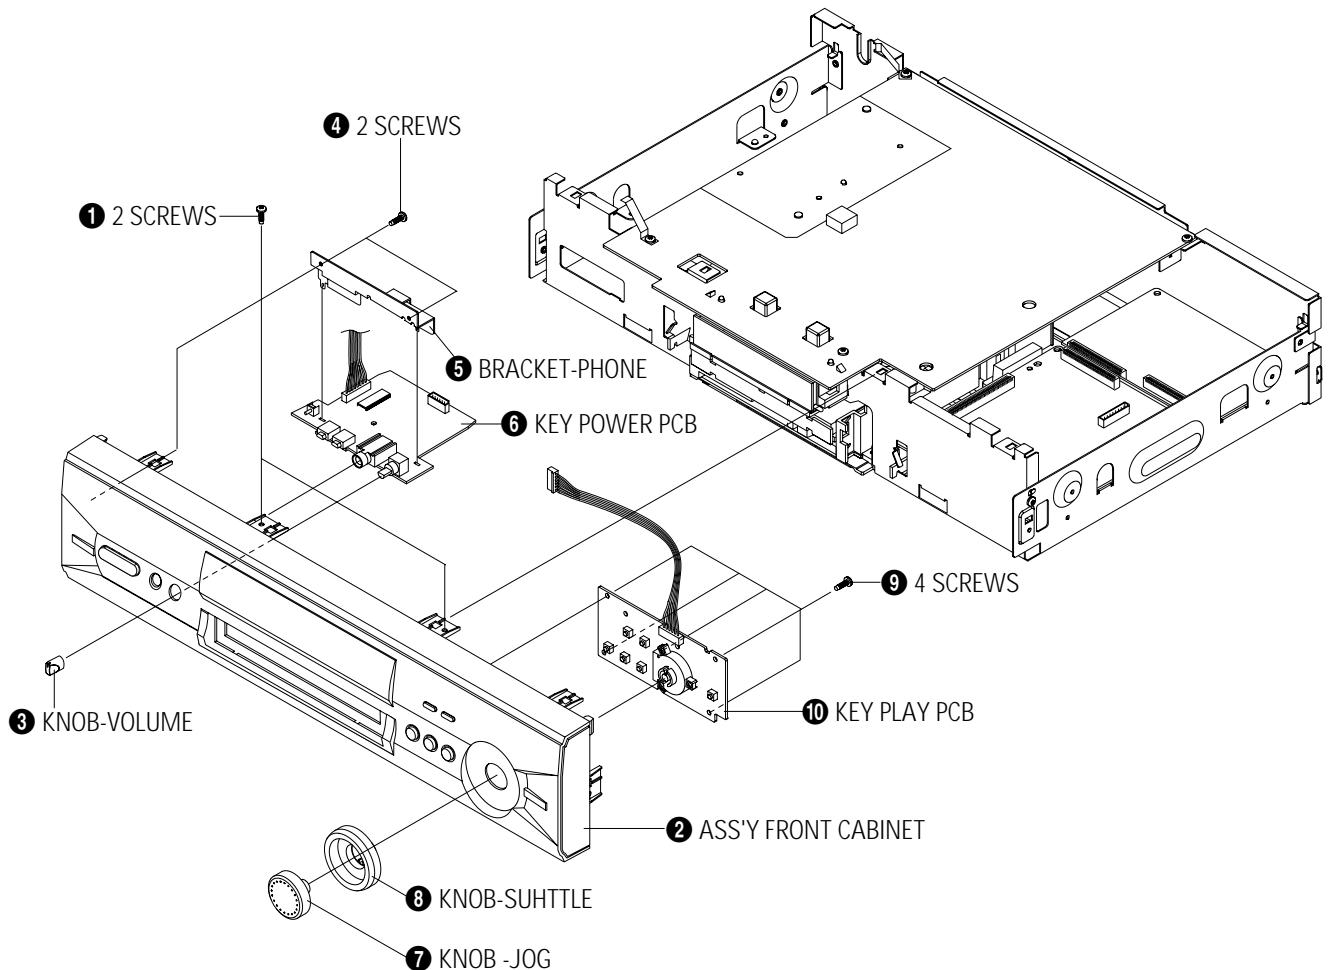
Ass'y Front Cabinet, Key Power PCB, Key Play PCB Removal
